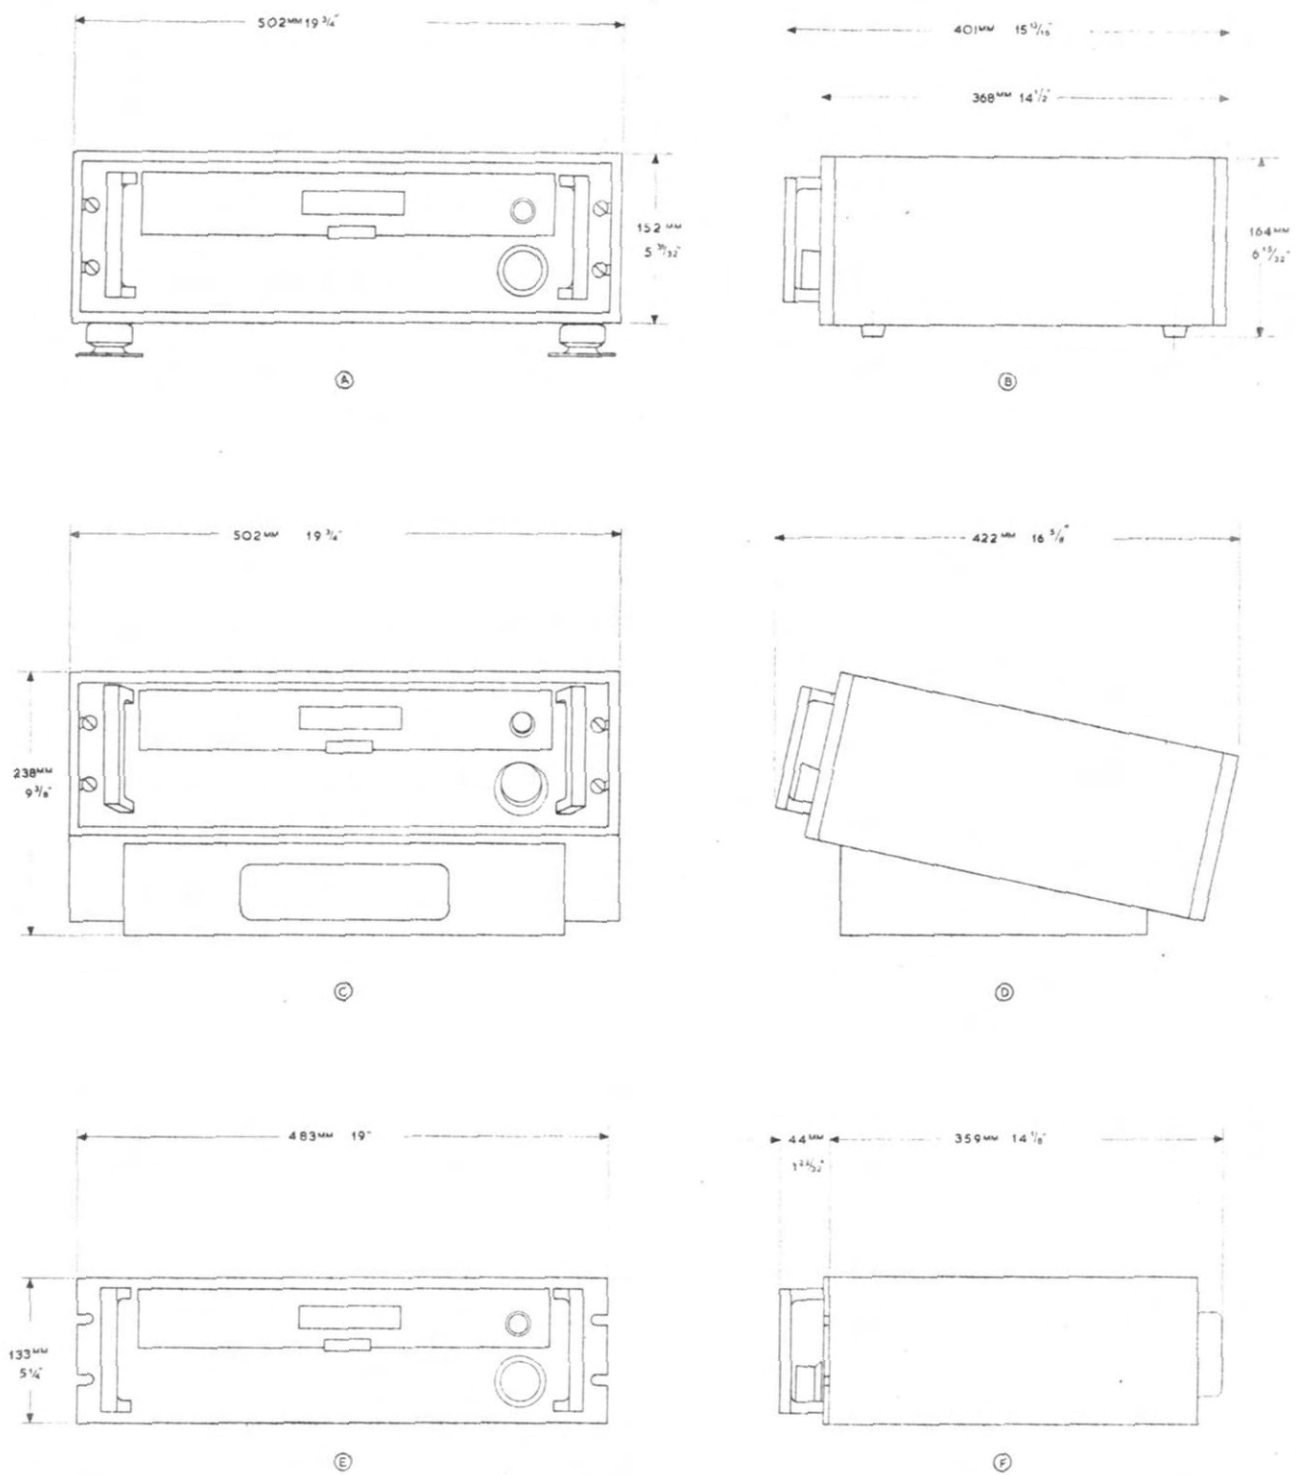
Dimensions of the Receiver in all mounting styles.
